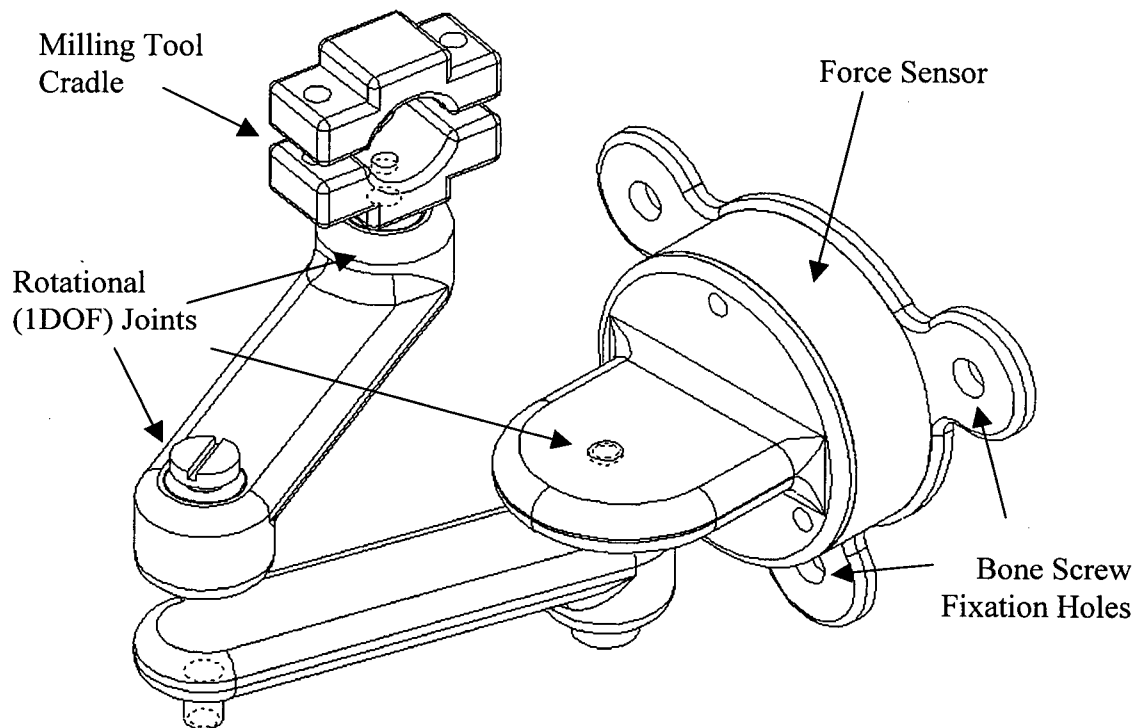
Wire-view of 3 degree of freedom (DOF) prototype passive milling guide.
